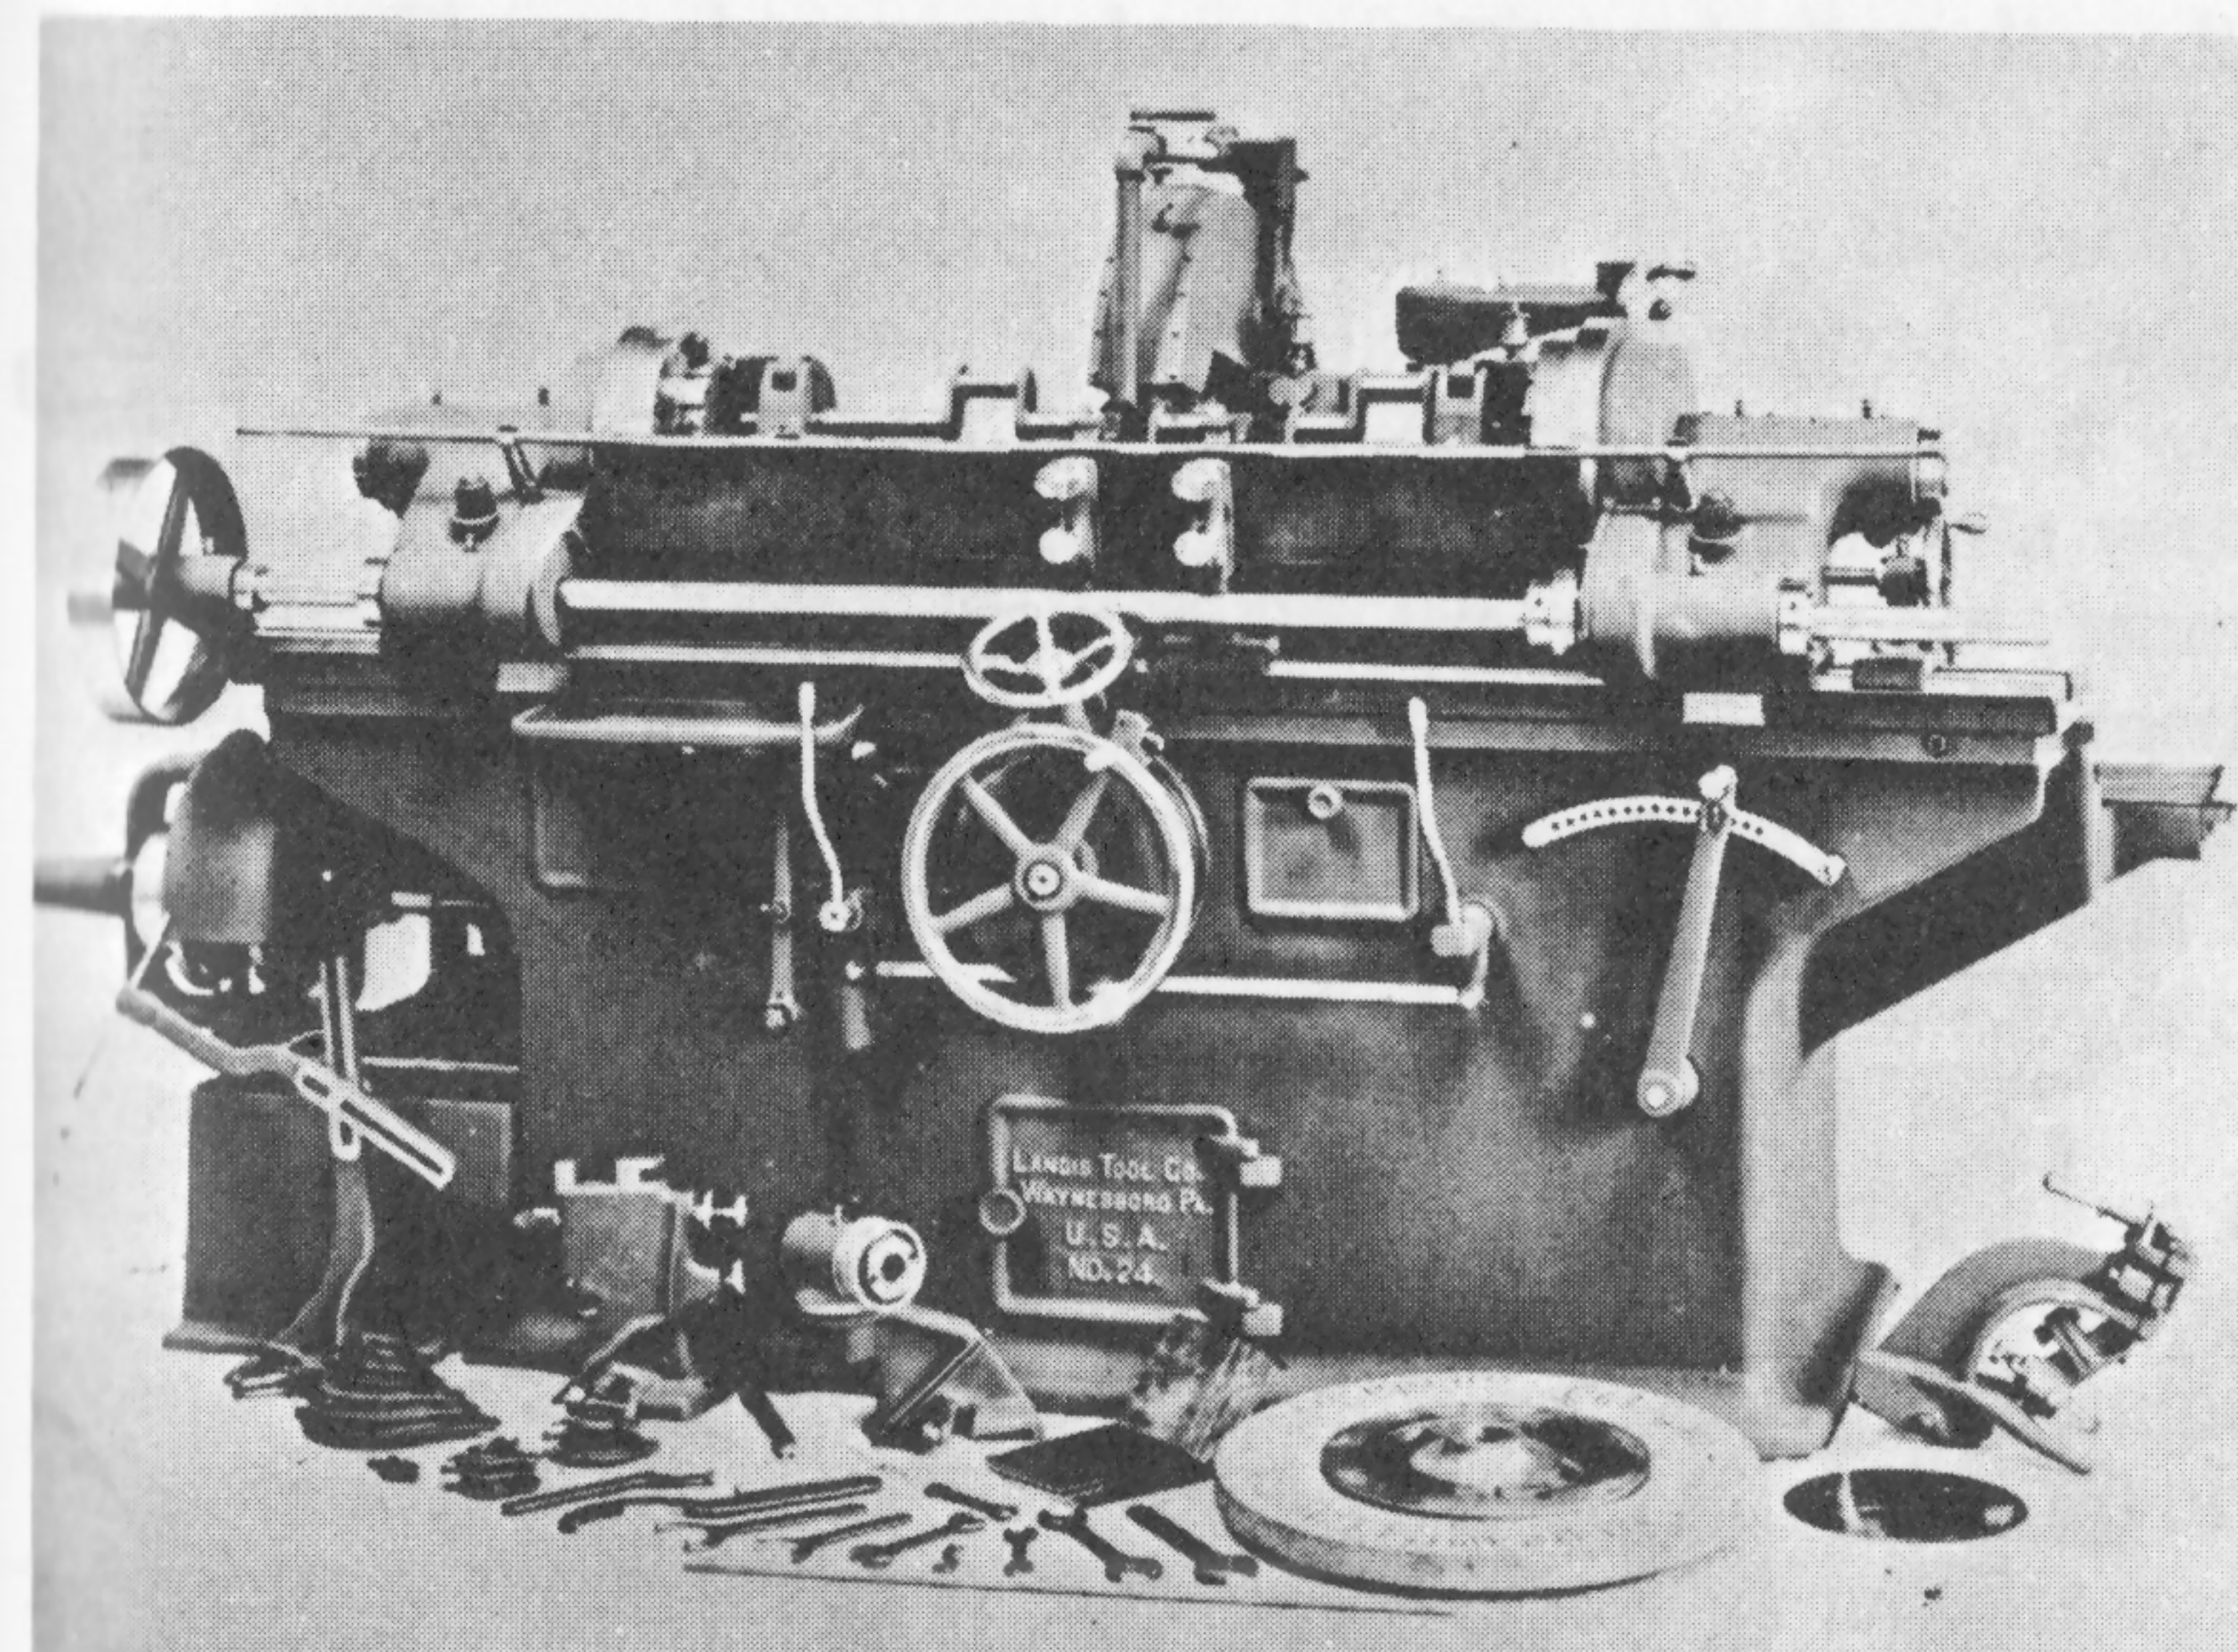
LANDIS AUTOMOBILE CRANKSHAFT GRINDER, 1906
